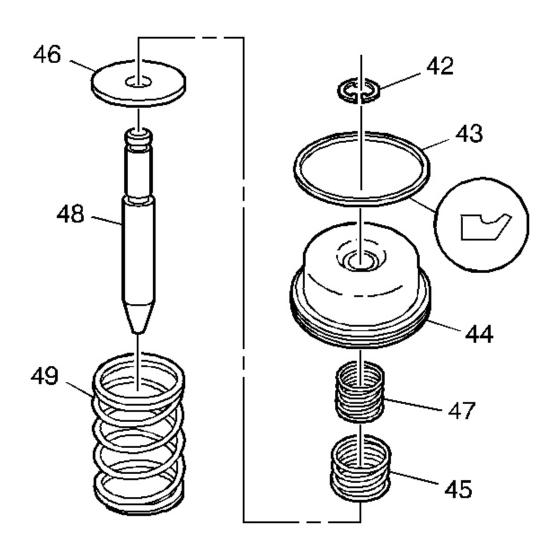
View Of Reverse Band Servo Assembly Components Courtesy of GENERAL MOTORS CORP.
